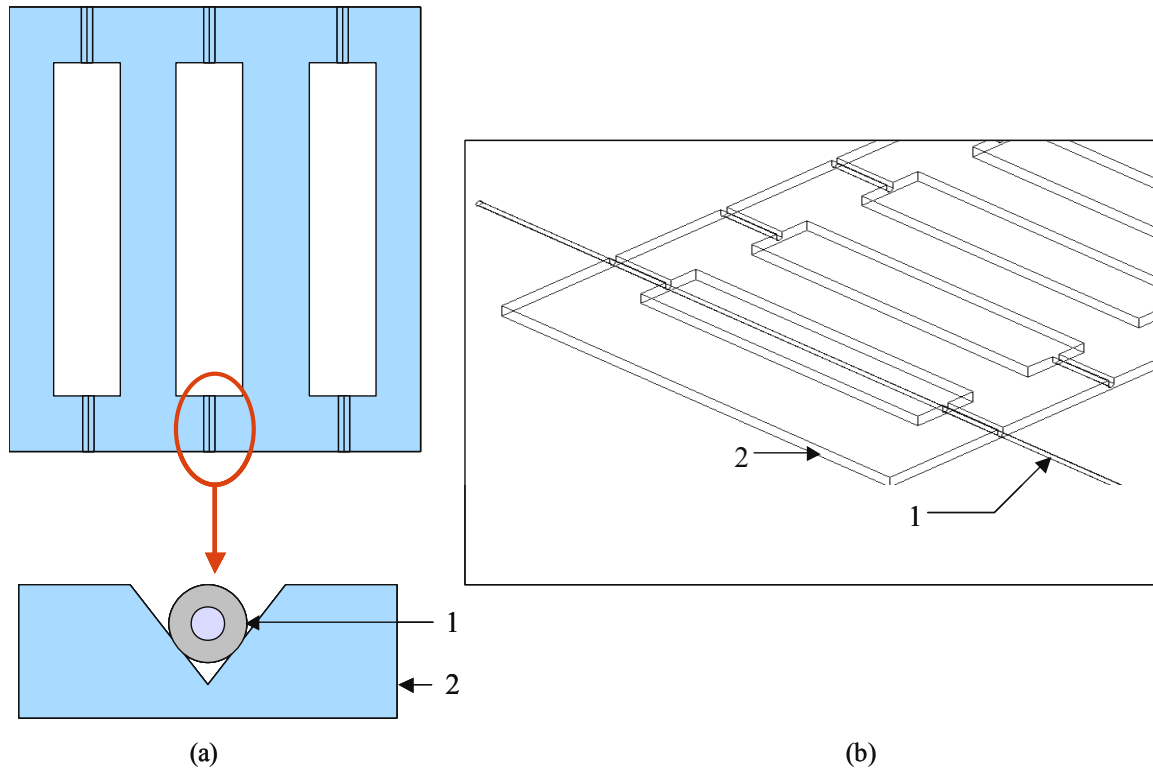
Schematic views of the custom-made silicone mould for making strips of sensor substrates:
